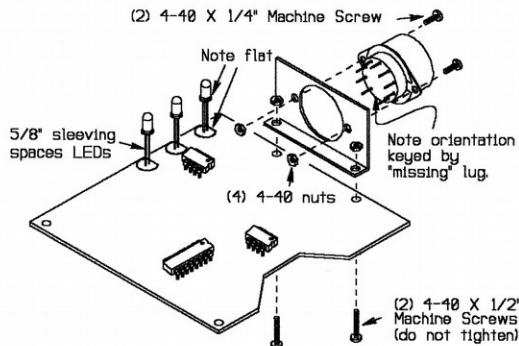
lengths of sleeving slipped over one of the leads properly spaces the LEDs to engage panel holes when the circuit board is installed in the case. The 1/2" long Screws which mount the tube bracket will mount the circuit board in the case in later steps.
